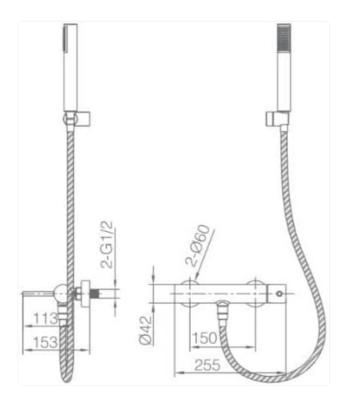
Technical drawing illustrating the dimensions and connection points of the shower mixer and hand shower.
